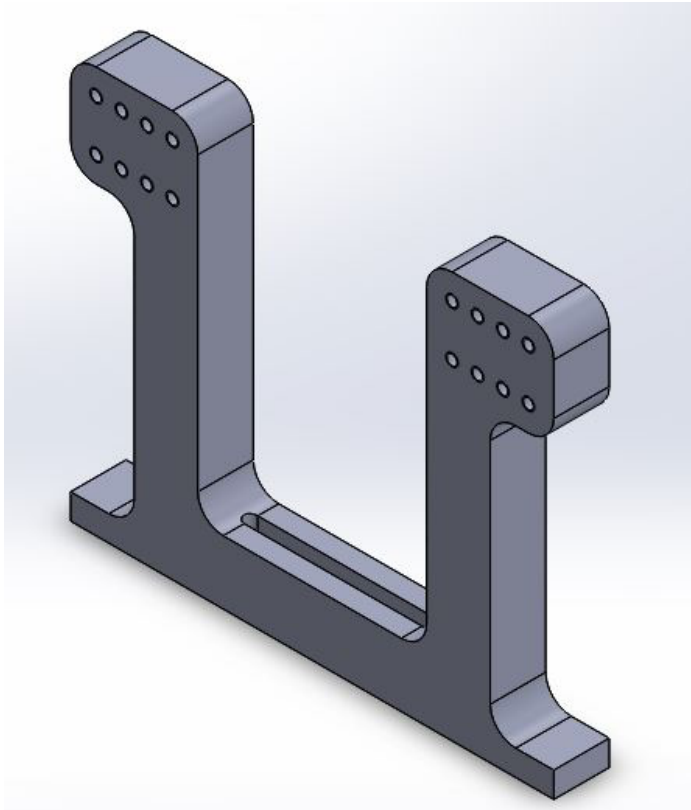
U-base showing mounting hole array on upright sections and single bolt table attachment slot.
